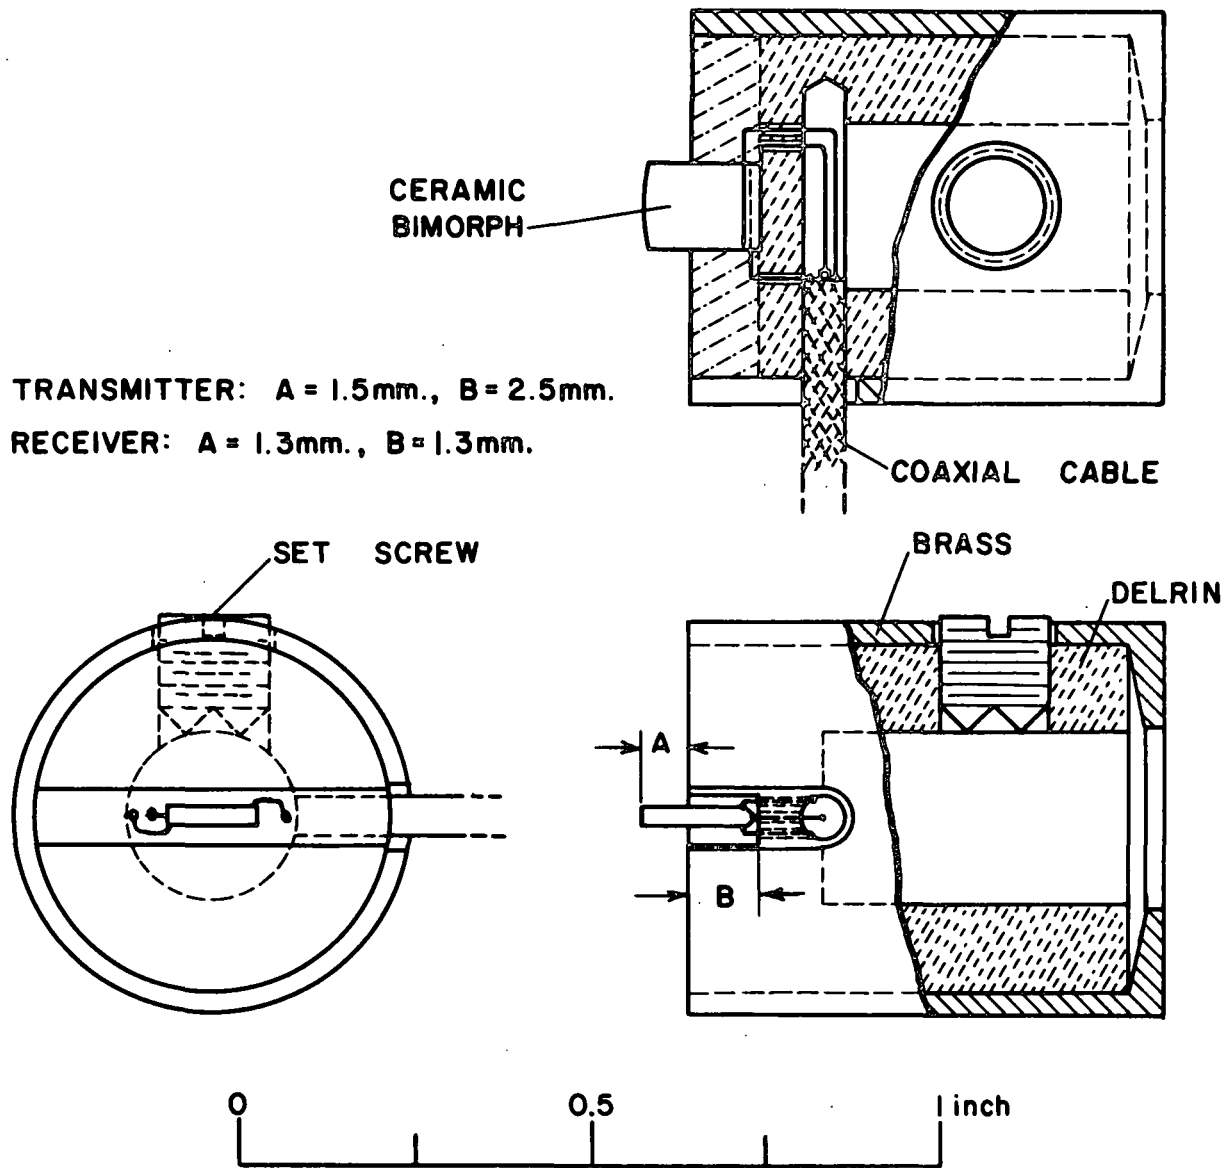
Mechanical drawing of the transducers used in the robotic tester.
